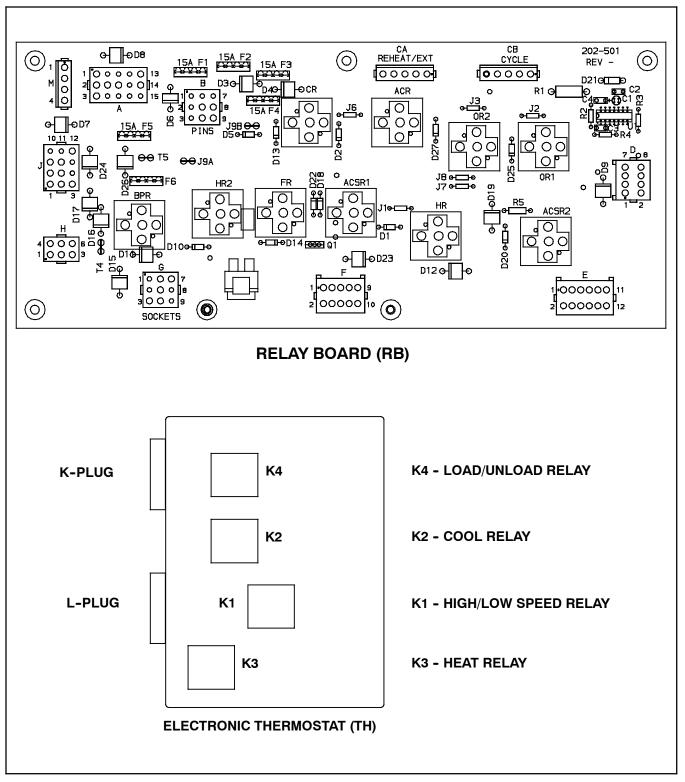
Electrical Control Panel Relay Board (RB) & Electronic Thermostat (TH) Outline Views.
